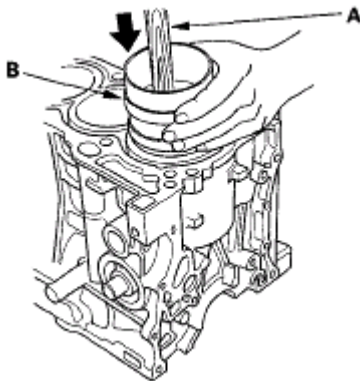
Positioning Piston/Connecting Rod Assembly In Cylinder
